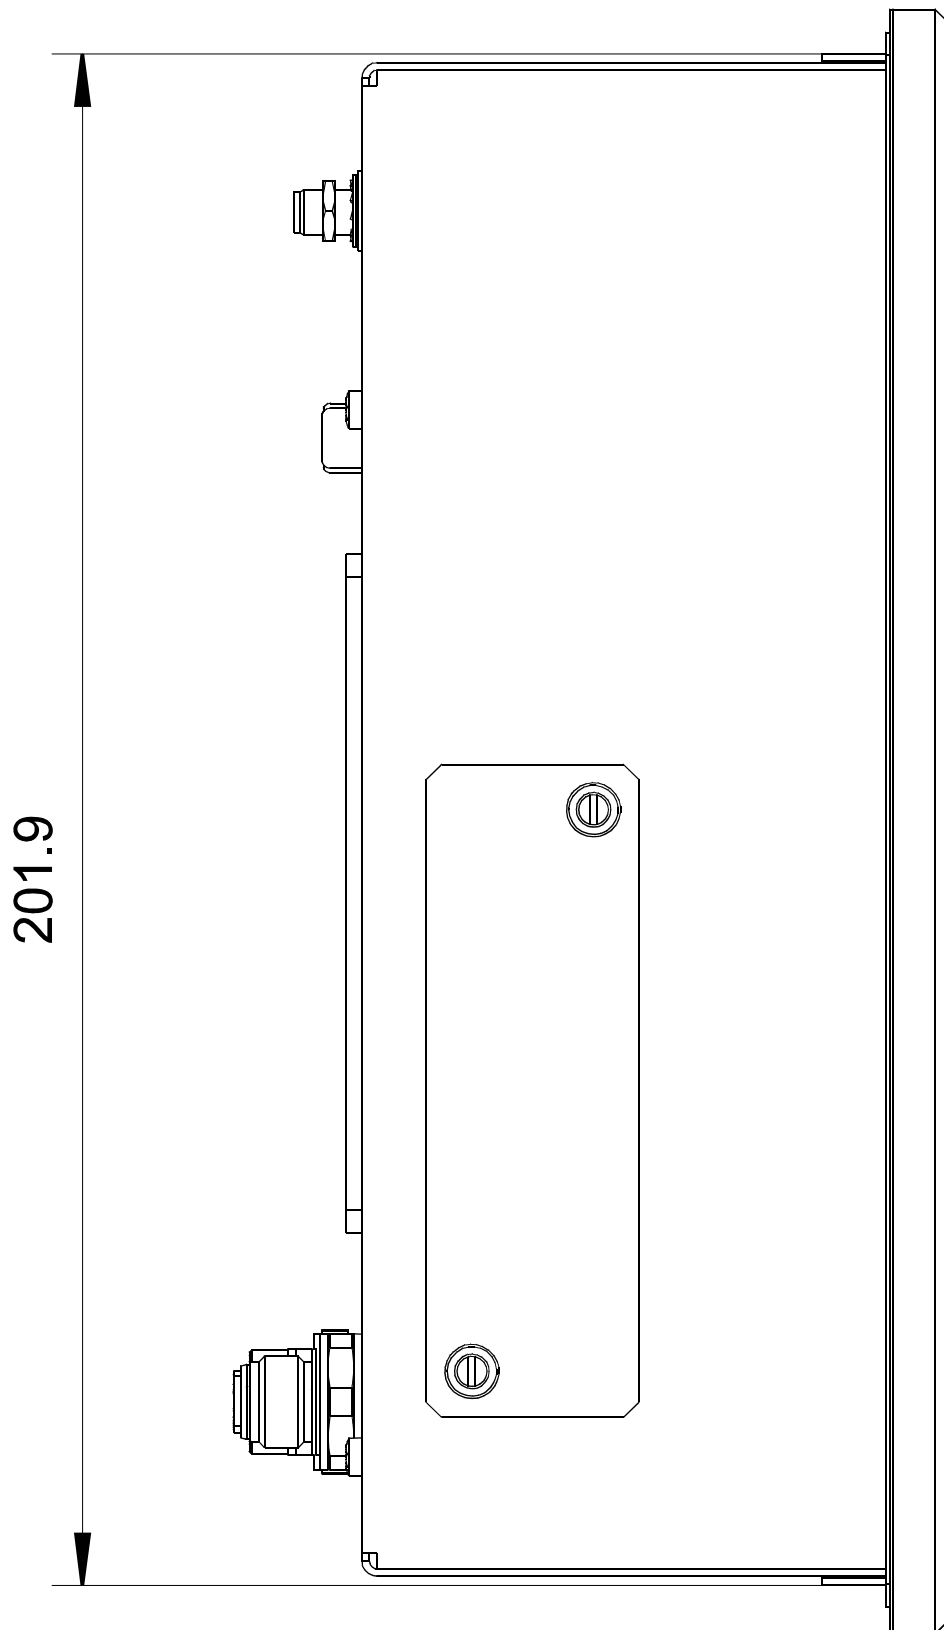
Assembly Drawing of the HMITR-104 Both Versions (Left)
